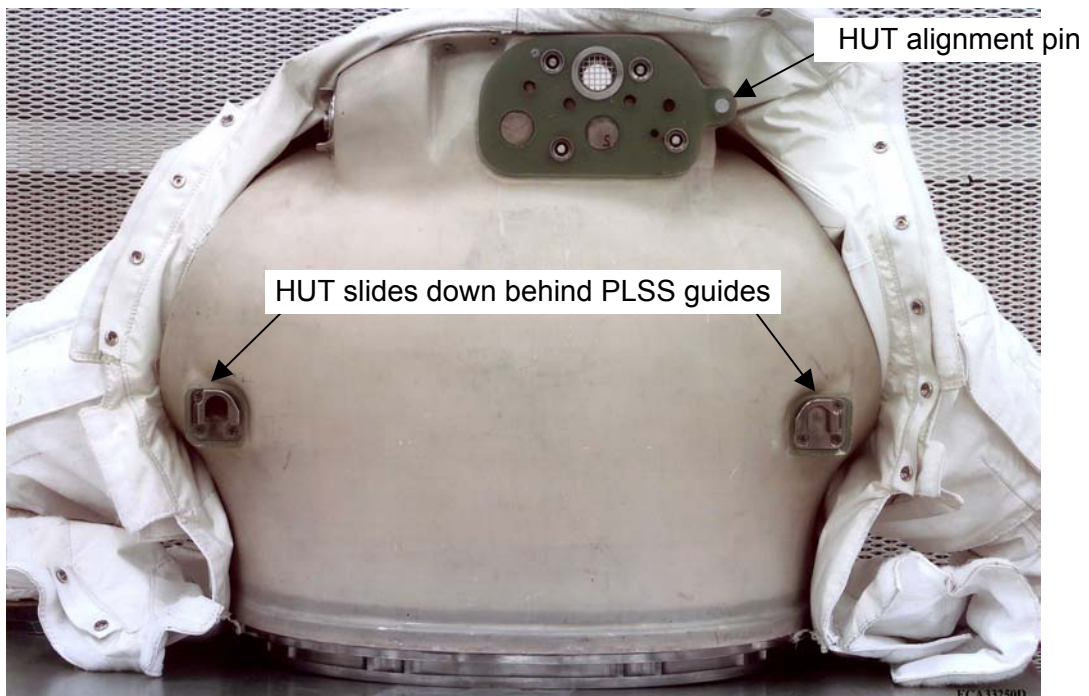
HUT Lower Mounts (Trailer Hitches).
